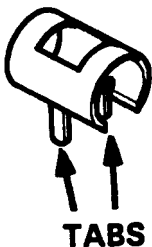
M4/M16A2 Mounting Bracket.
